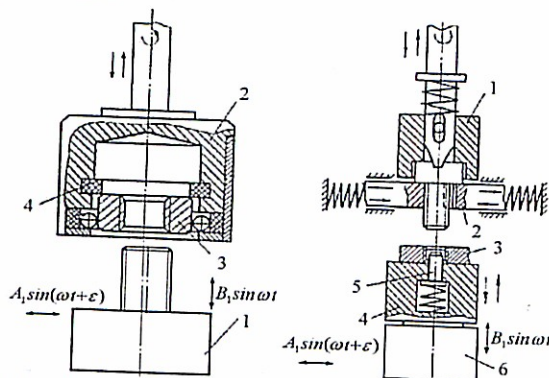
Vibrational devices for connecting thread parts: a – for screwing a screw onto a bolt; b – for joining screw with the bushing.
